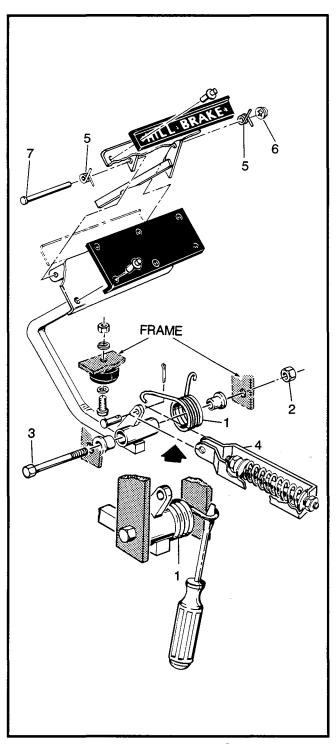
BRAKE PEDAL SPRING RE-MOVAL
